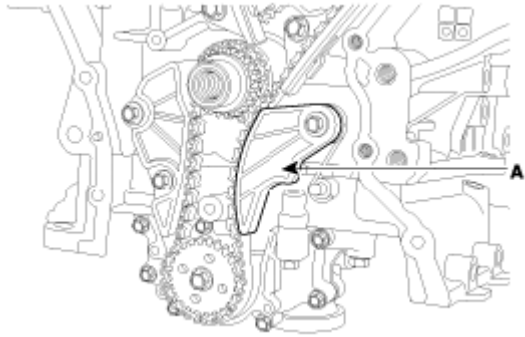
Identifying Oil Pump Chain Tensioner Assembly
